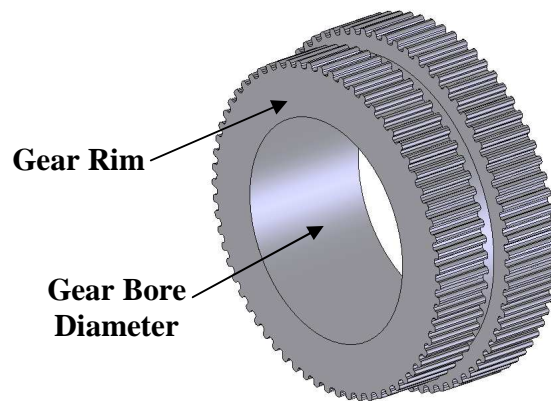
Gear Rim Shown on HGT Wobble Gear
